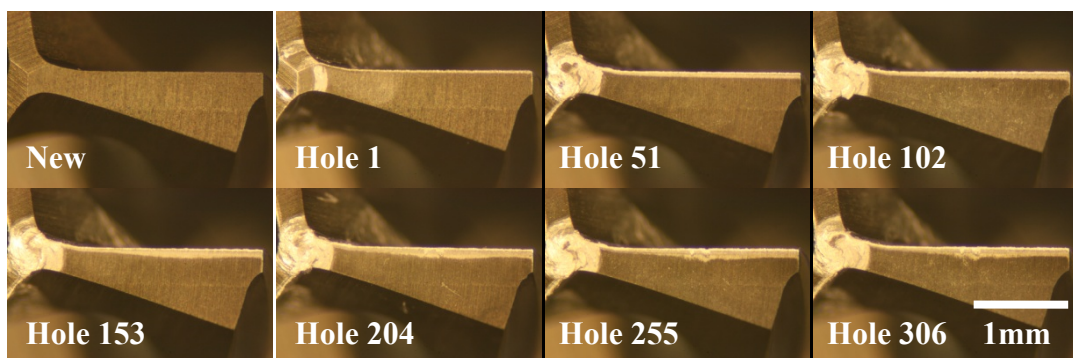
Tool wear micrographs of Dymon-iC™ drill under 70bar cutting fluid, 260m/min cutting speed (Test 12)
